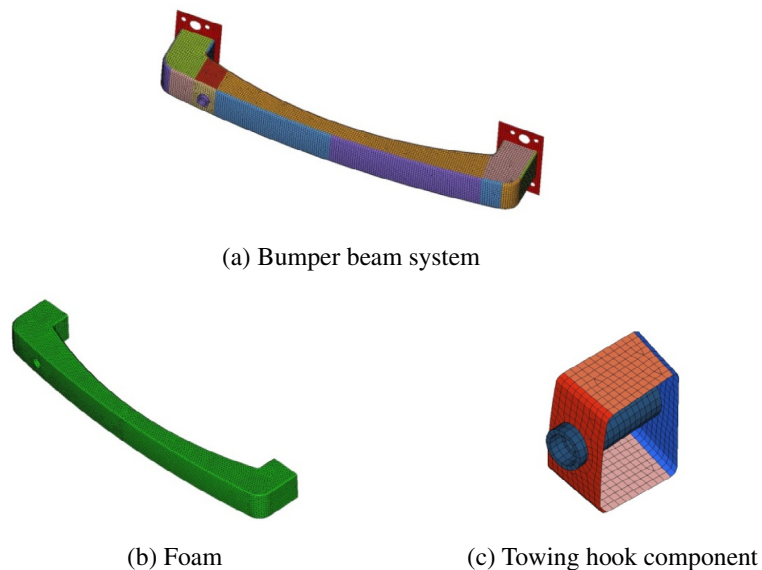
The finite element model of the bumper beam system: (a) bumper beam system; (b) foam; (c) towing hook component.
